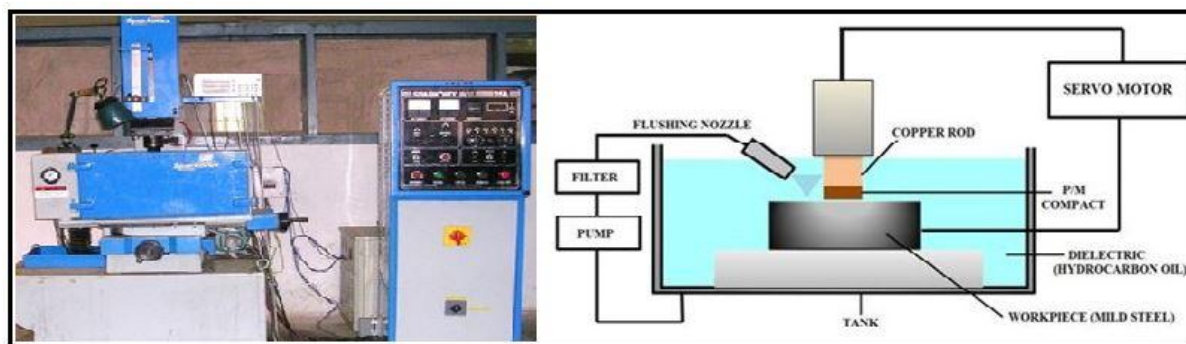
EDM set up and schematic diagram of EDM machine for surface alloying
